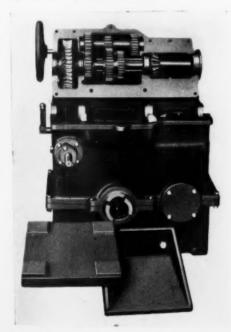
Another view of the stoker drive with cover on reducer removed to show details
